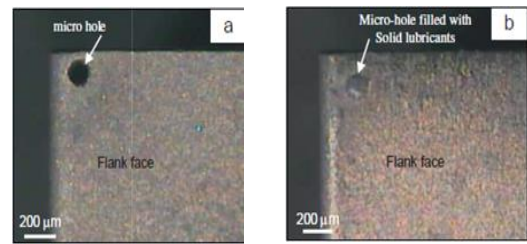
Micro hole in the flank face of the carbide tool filled (a) without (b) with MoS_2 solid lubricants.[6]
